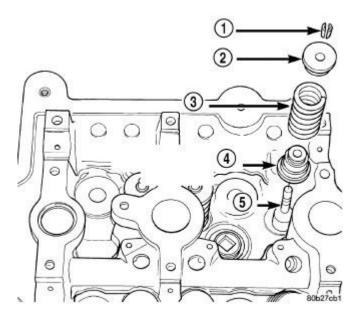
Valve Seal & Spring Courtesy of CHRYSLER LLC
